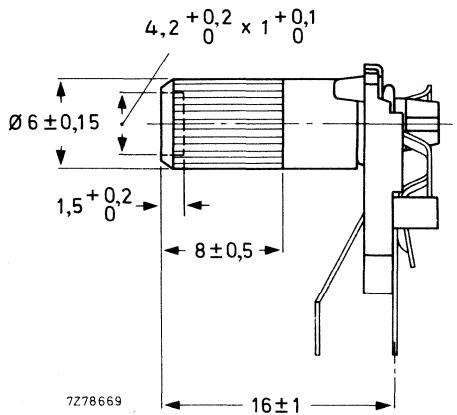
Test switch for vertical mounting, with adjustment knob at the side of the base plate.
